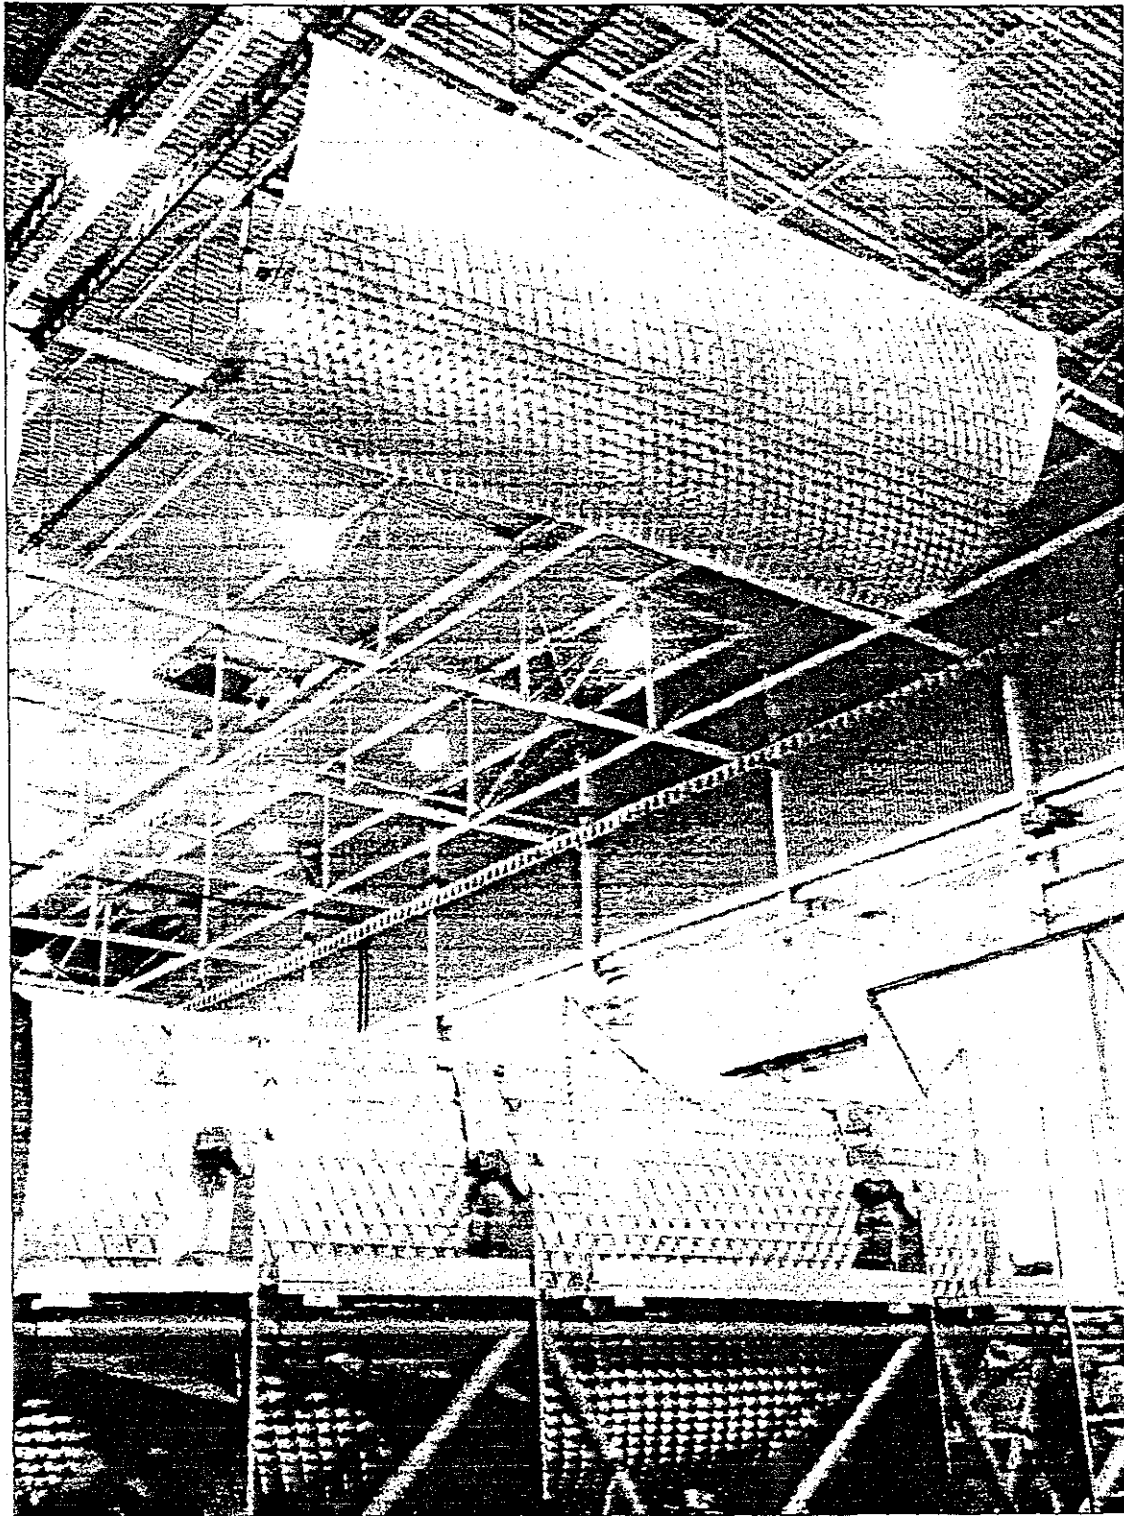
Hoisting the one third cylinder segment into position above the weld fixture.
